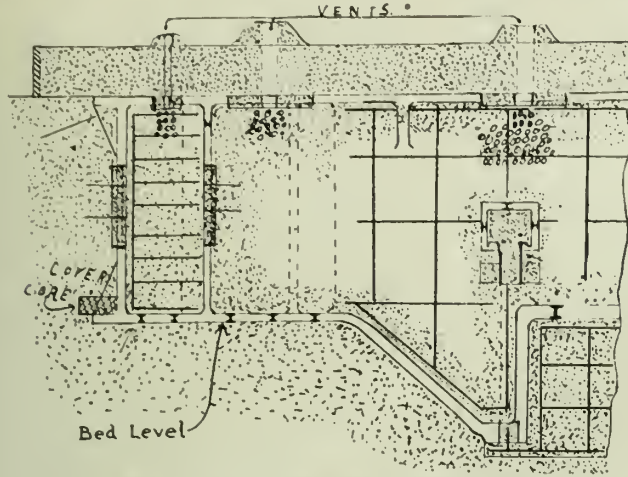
SIDE SECTION VIEW OF ASSEMBLED MOULD. MARINE ENGINE BED.
